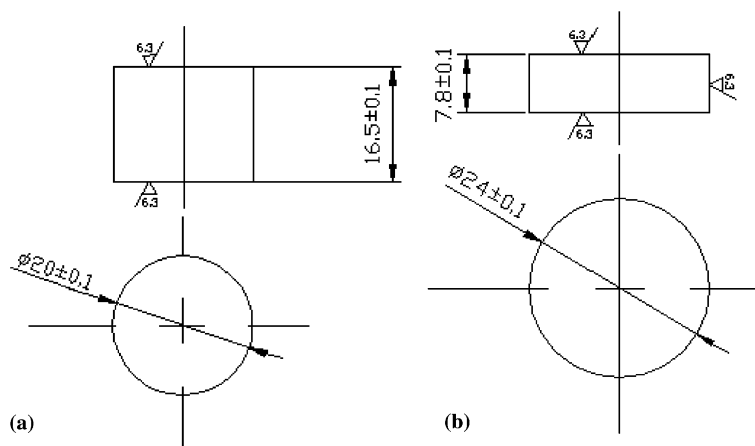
The dimensions of the specimens. (a) Upper specimens; (b) lower specimens.
